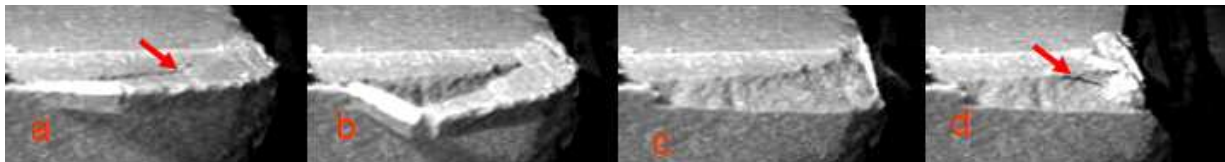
Chip forming/crack expansion I in initial stage of cutting
